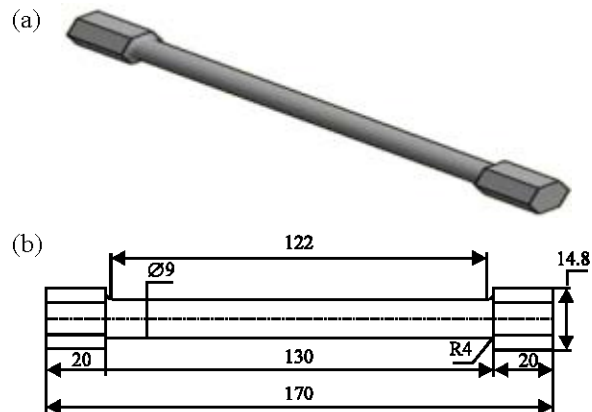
Geometric and dimensions of torsion test specimen (dimension in mm)
